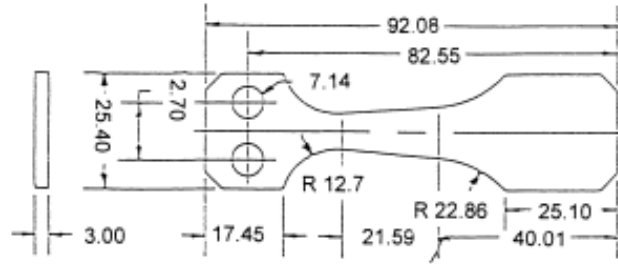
Cast Aluminum Ingot Test Specimen for Reciprocating-Bending Fatigue Testing
